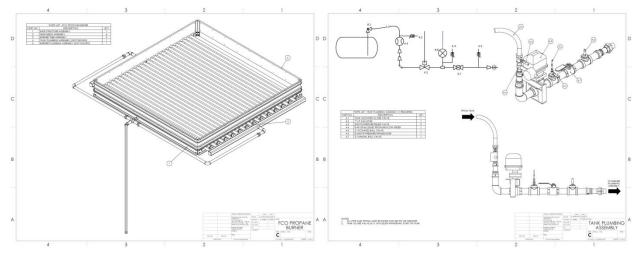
Dahlgren propane burner and propane burner tank piping assembly
